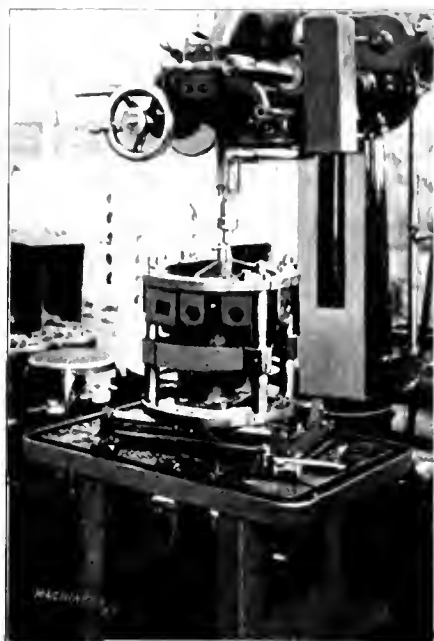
Jig for Holding Cylinders while Drilling, Reaming or Tapping the Various Holes
